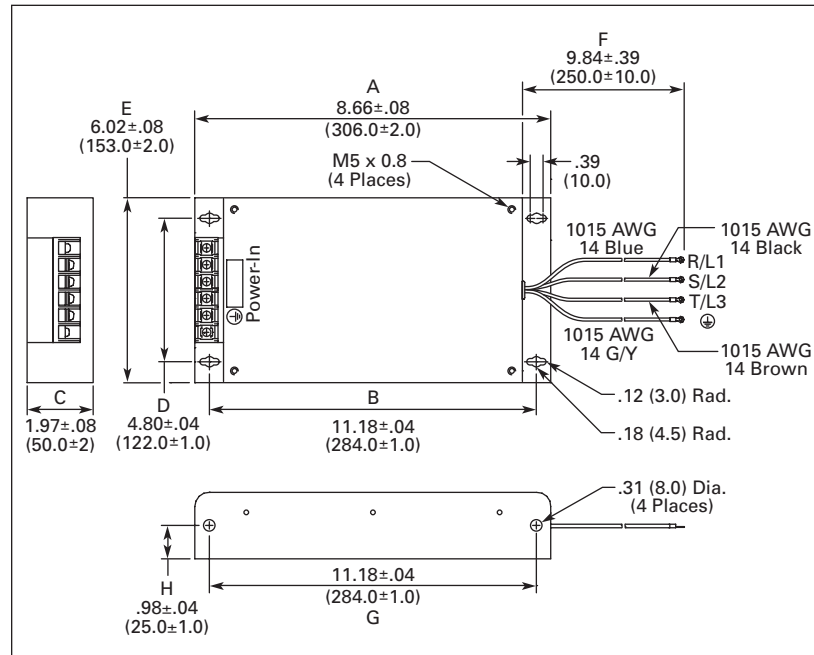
Approximate Dimensions in Inches (mm) — 26TDT1W4C
